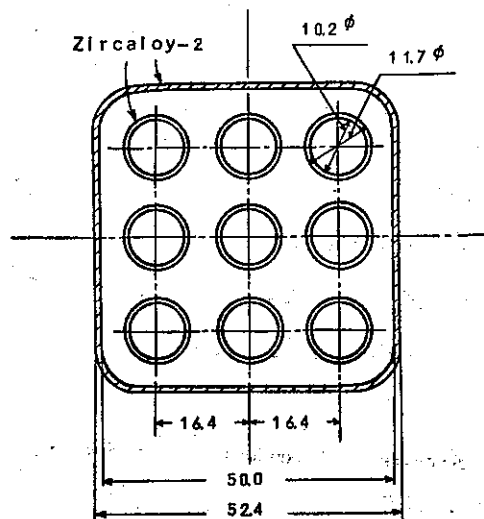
Typical Arrangement of Test Fuel Assembly in HBWR Core
